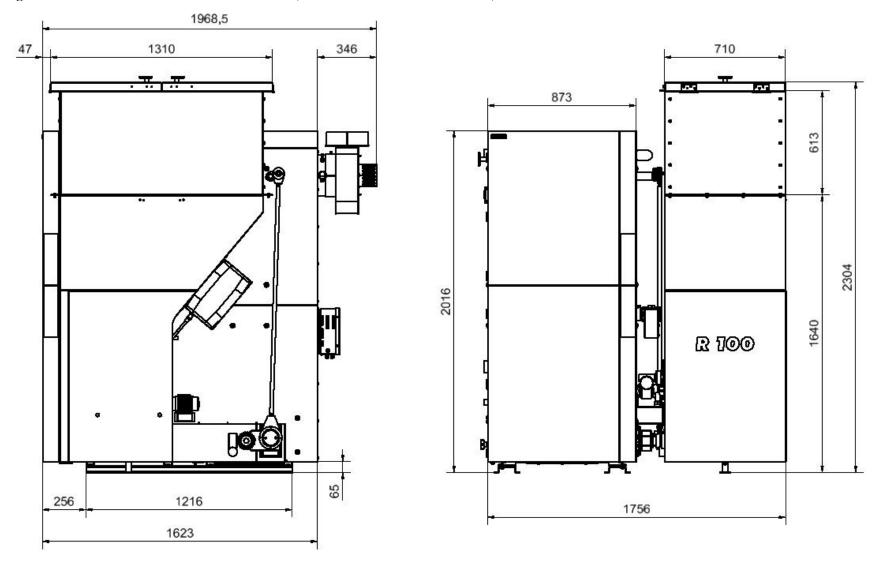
Basic dimensions of BENEKOV R100 boiler (with additional module of fuel bin)
